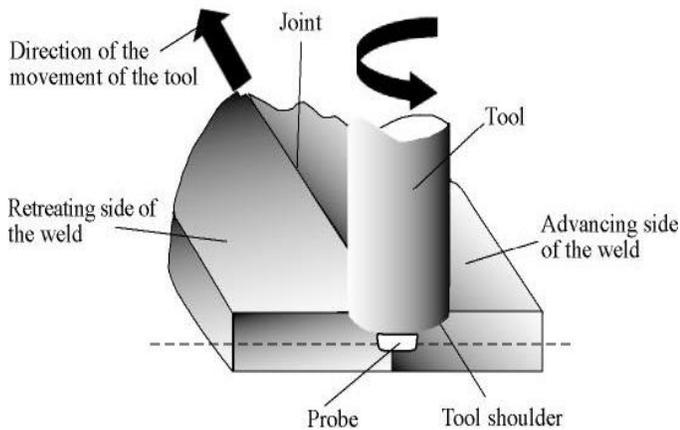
Two discrete metal workpiece butted together, along with the tool (with a probe)
